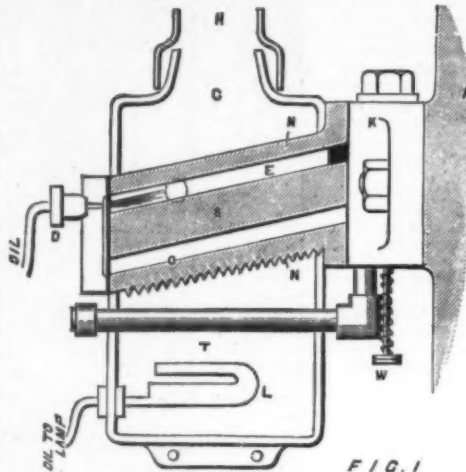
VAPORIZER, HOWARD OIL ENGINE.
